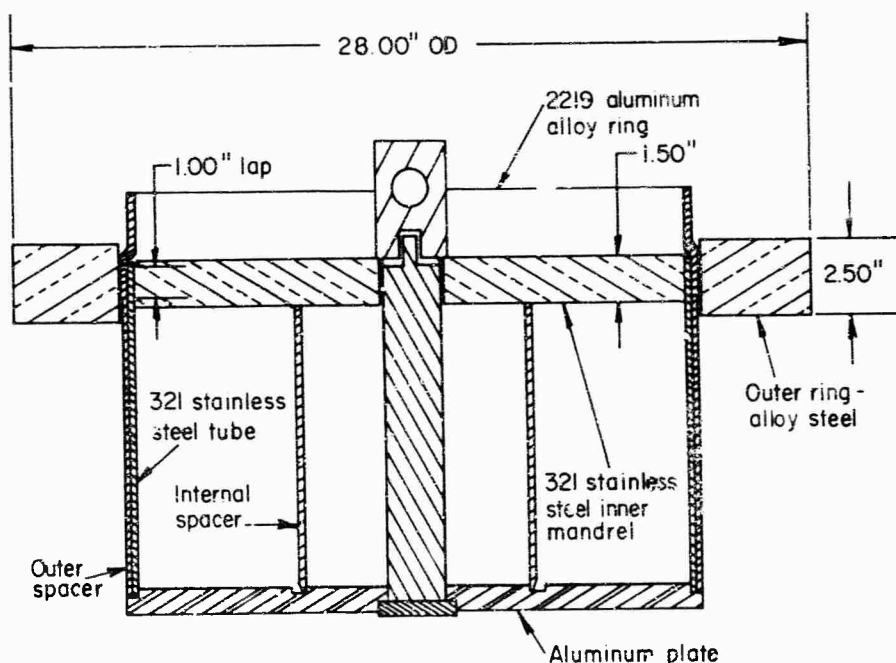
ARRANGEMENT OF PARTS AND TOOLING FOR WELDING 20-INCH-DIAMETER TUBULAR ASSEMBLIES (49)
